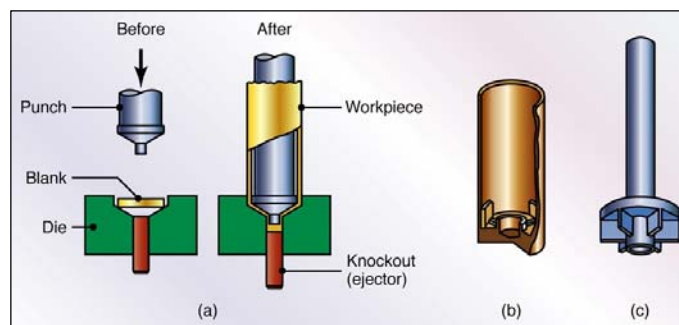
(a) Impact extrusion of a collapsible tube by the *Hooker process*. (b) and (c) Two examples of products made by impact extrusion. These parts also may be made by casting, forging, or machining. The choice of process depends on the materials involved, part dimensions, and wall thickness, and the product properties desired. Economic considerations also are important in final process selection.
